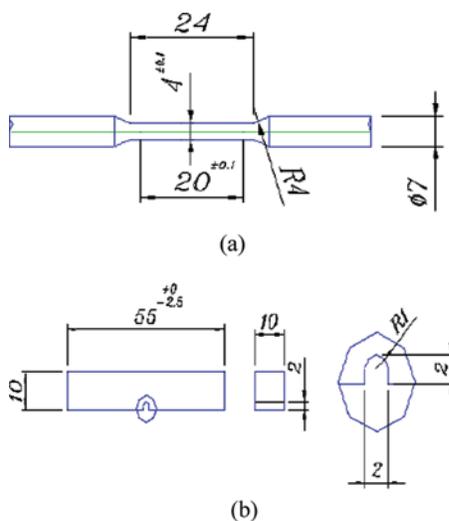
A schematic of test specimens: (a) tensile testing specimen and (b) Charpy testing sample. Dimensions in mm (color figure available online).
